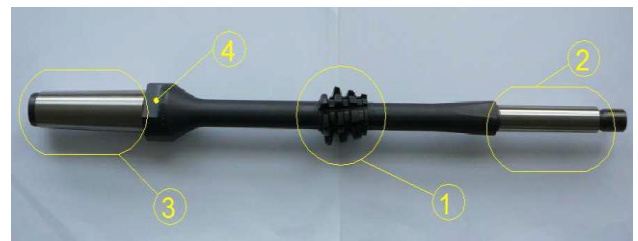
Tool - tapered hobbing cutter (1 – cutting part; 2 – supporting cylindrical shank; 3 – morse cone; 4 – drift pads)
